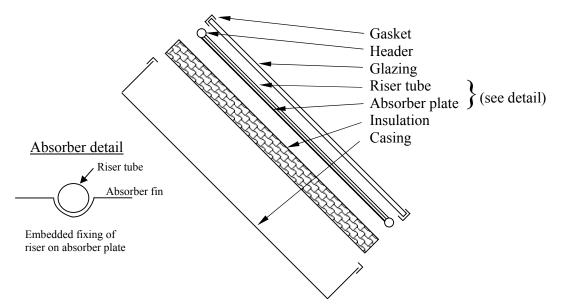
Exploded view of a flat-plate collector and absorber detail
